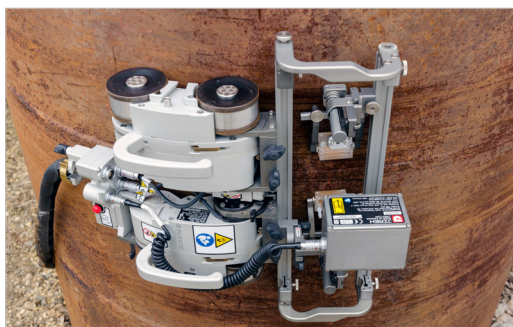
and 6: Automated crawler for corrosion and weld inspection. Handles removable.
